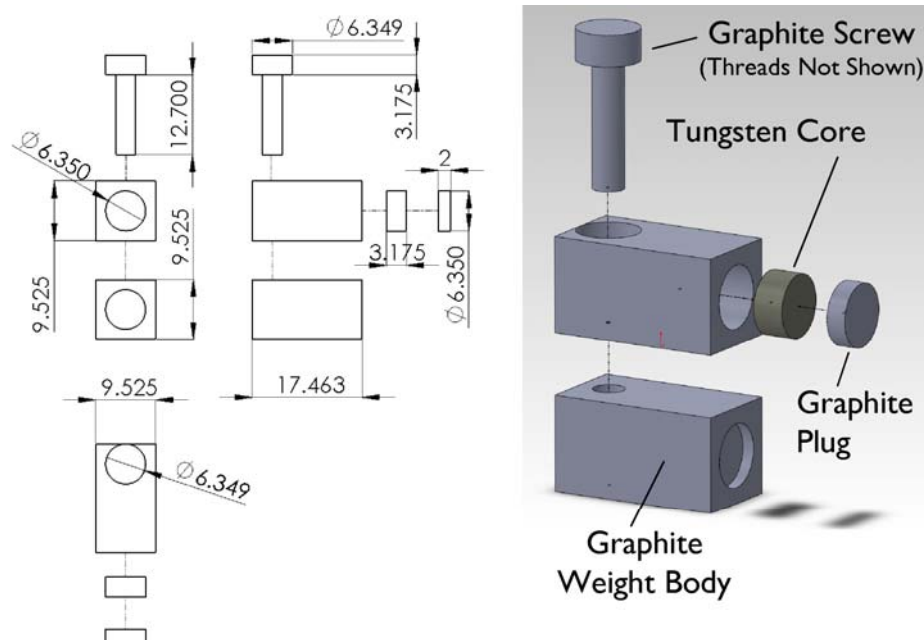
(Left) Dimensions (in mm) for tungsten-core weight assembly used for higher tension studies and screws used for both weight assemblies and tensioning frame; (right) exploded view of tungsten-core weight assembly.
